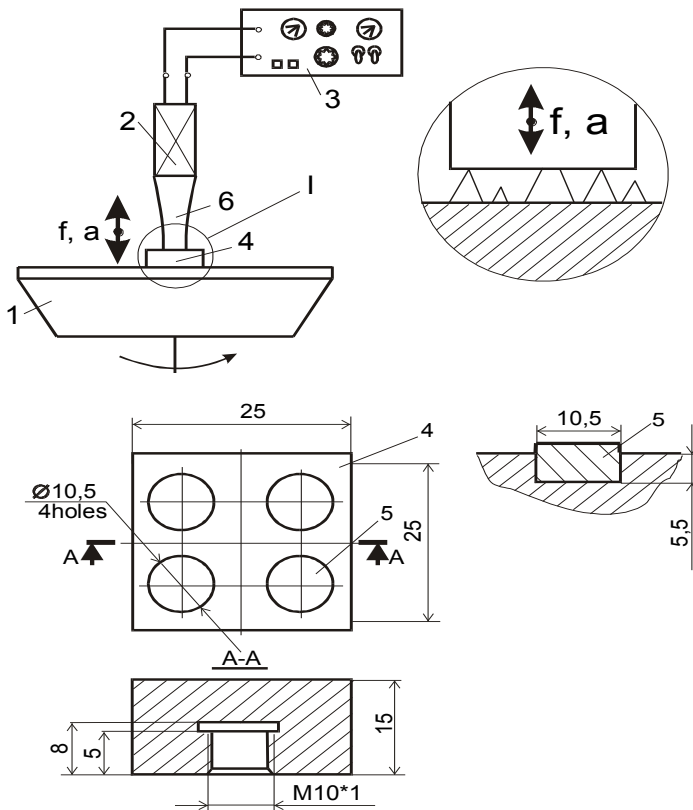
The scheme of vibrational-shock influence on a wheel working surface in an off-line zone: 1 – diamond wheel, 2 – magnetostrictive vibrator, 3 – ultrasonic oscillator, 4 – working tool, 5 – "tablet" from SHPM, 6 – concentrator
